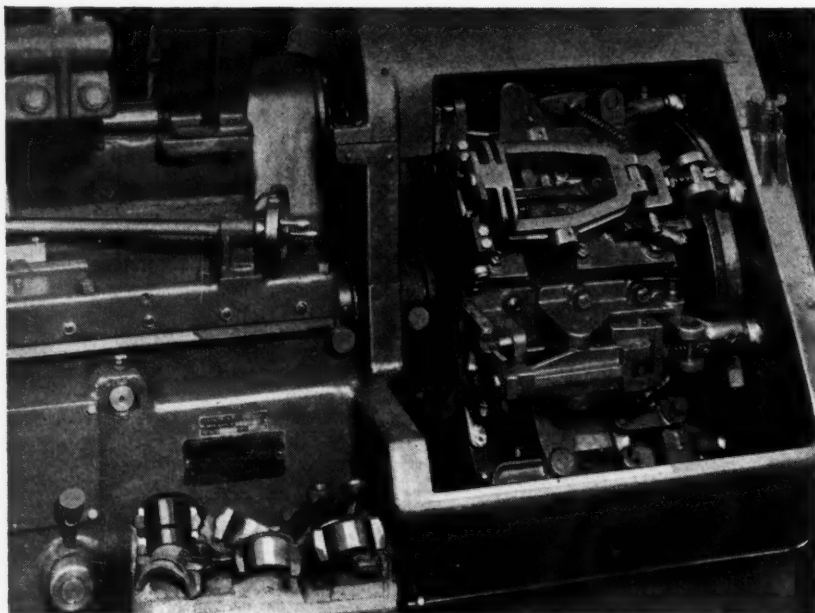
A Rotary Fixture which Holds Roller-bearing Rolls in Hardened and Ground Liner Bushings for Grinding Both Ends
